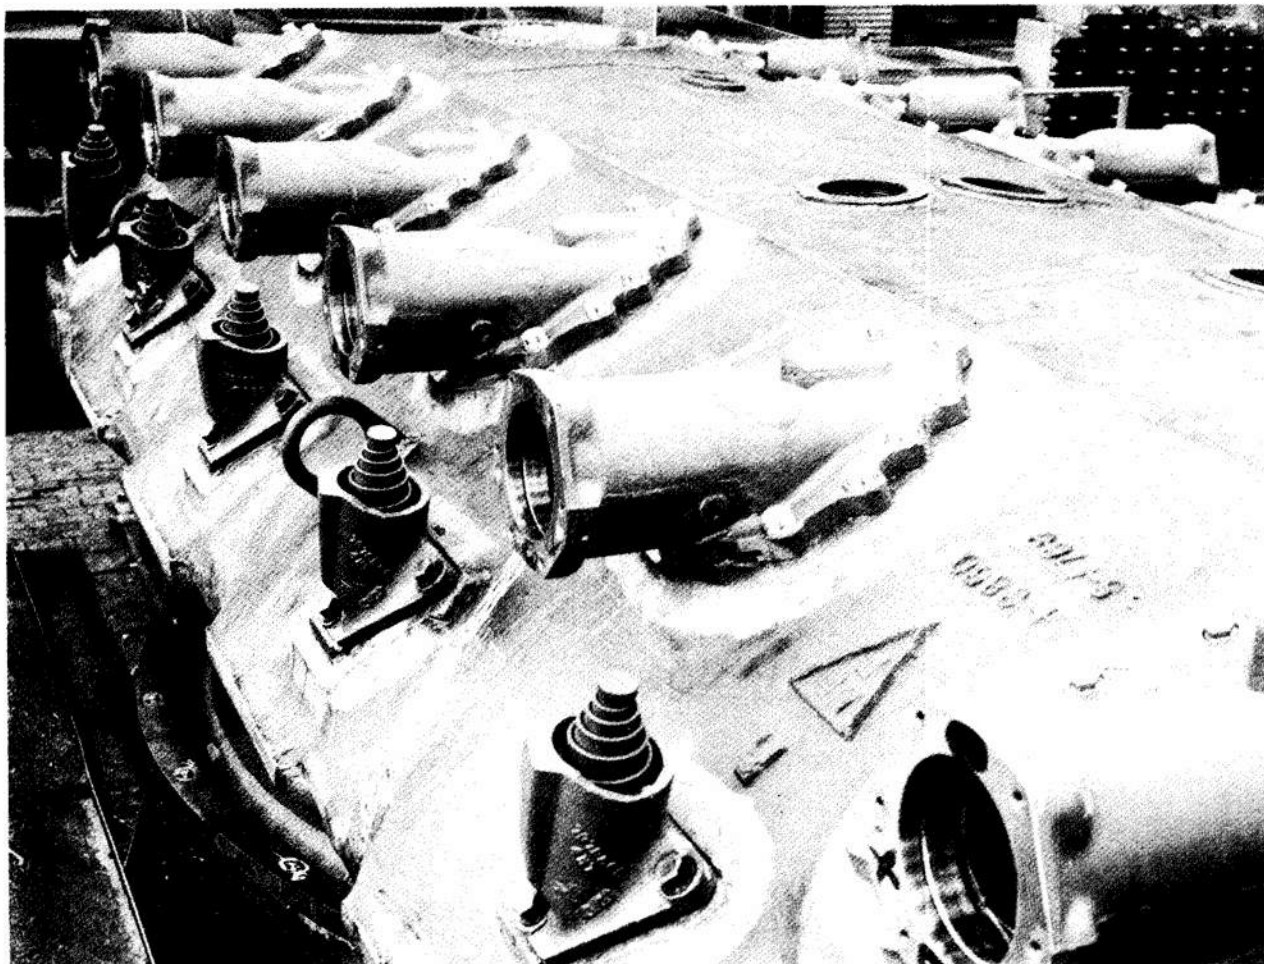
and 2-9 show two methods of attaching road wheel arm support housings to the hull—the former using bolts and the latter using weld. The hull in Fig. 2-8 is shown upside down for clarity. Note, also, the mounting of the road wheel arm bumper stops. Welded construction has the advantage of permanence and eliminates the need for providing seals against dirt and water, but its permanence makes the replacement of a damaged housing extremely difficult.
